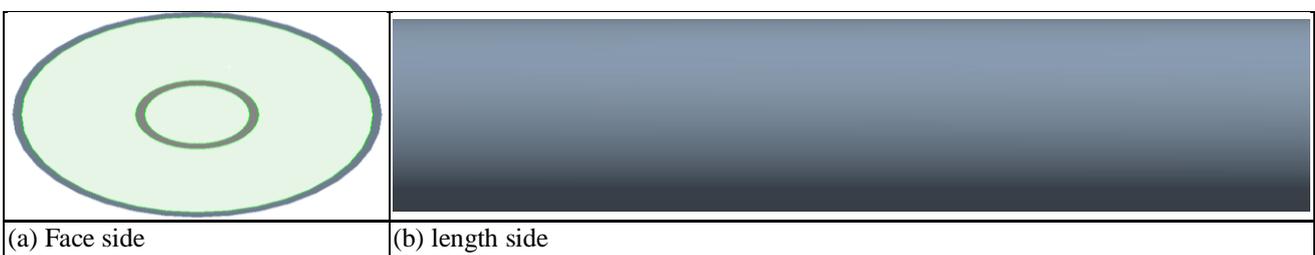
CAD model of double tube heat exchanger for smooth tube; (a) Face side (b) length side
